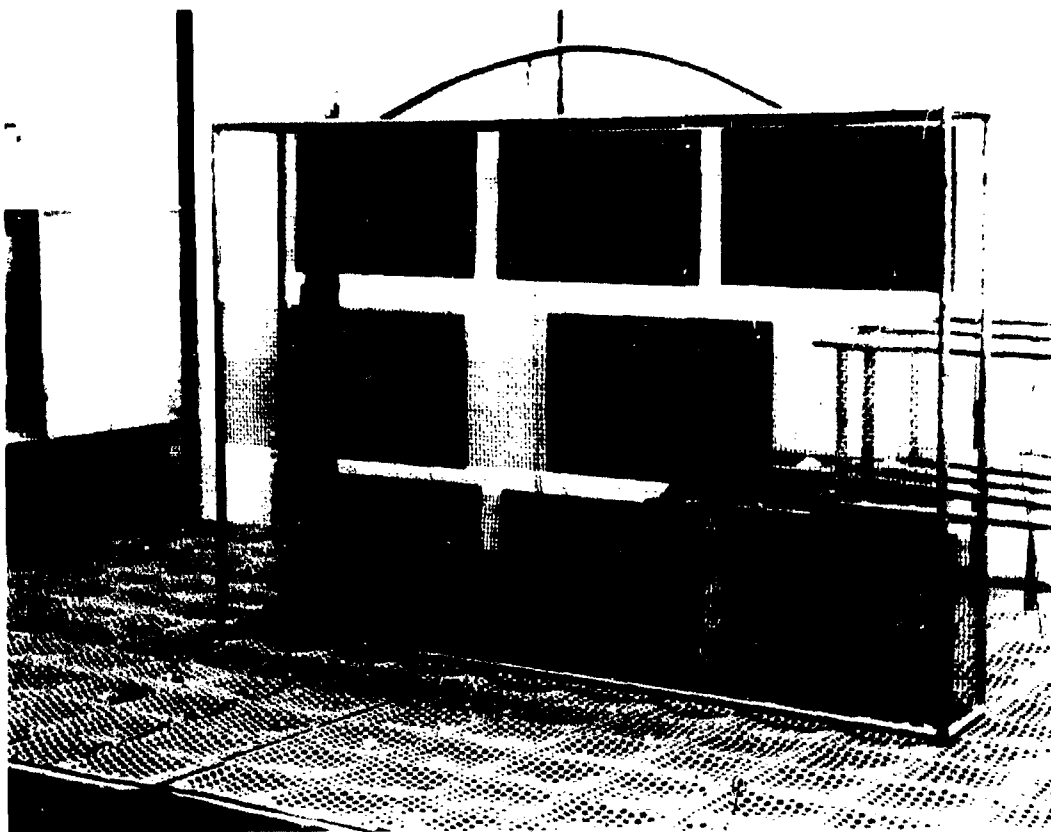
Panels on Heat Treat Fixture Ready for Furnace Aging
